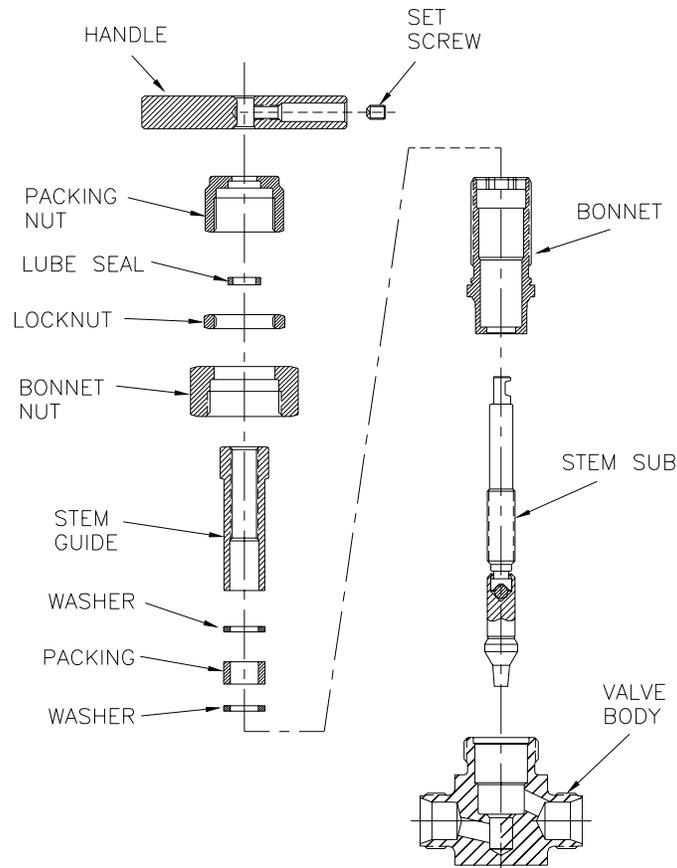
Size 6 & Size 12 Union Bonnet Valve Exploded View
